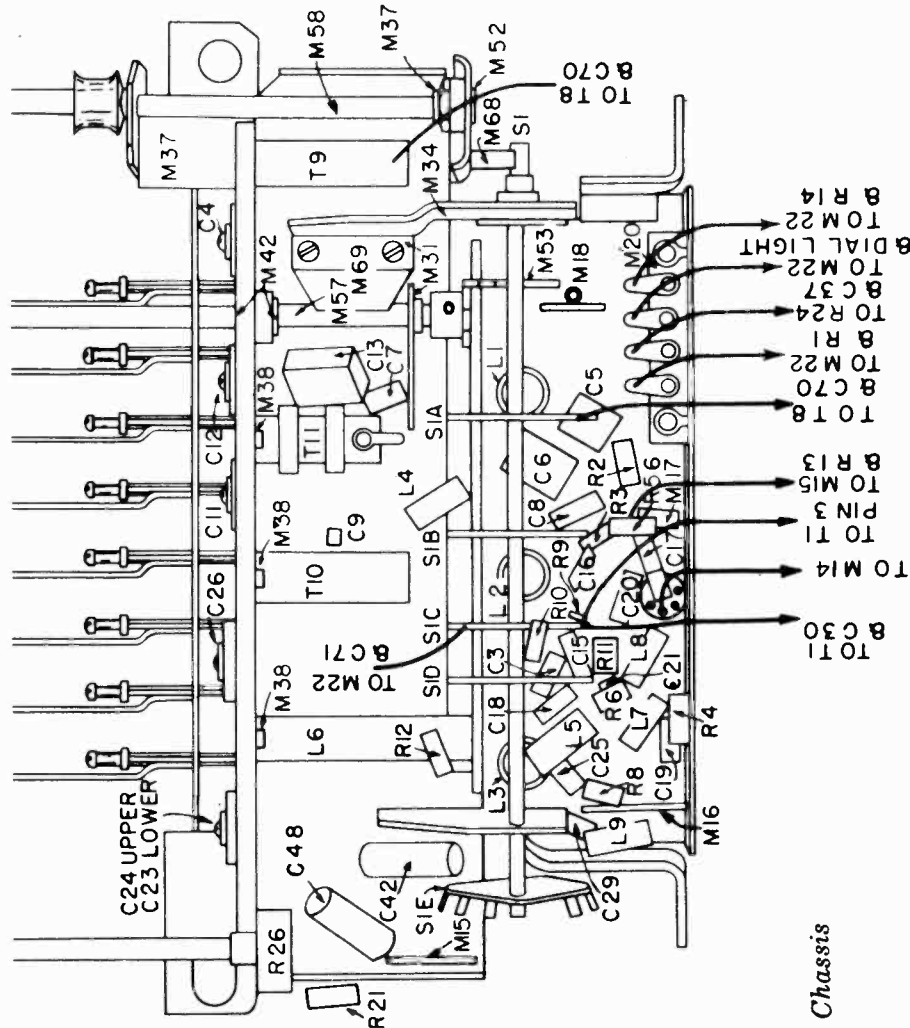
Component Diagram—Bottom View of Tuner Chassis
